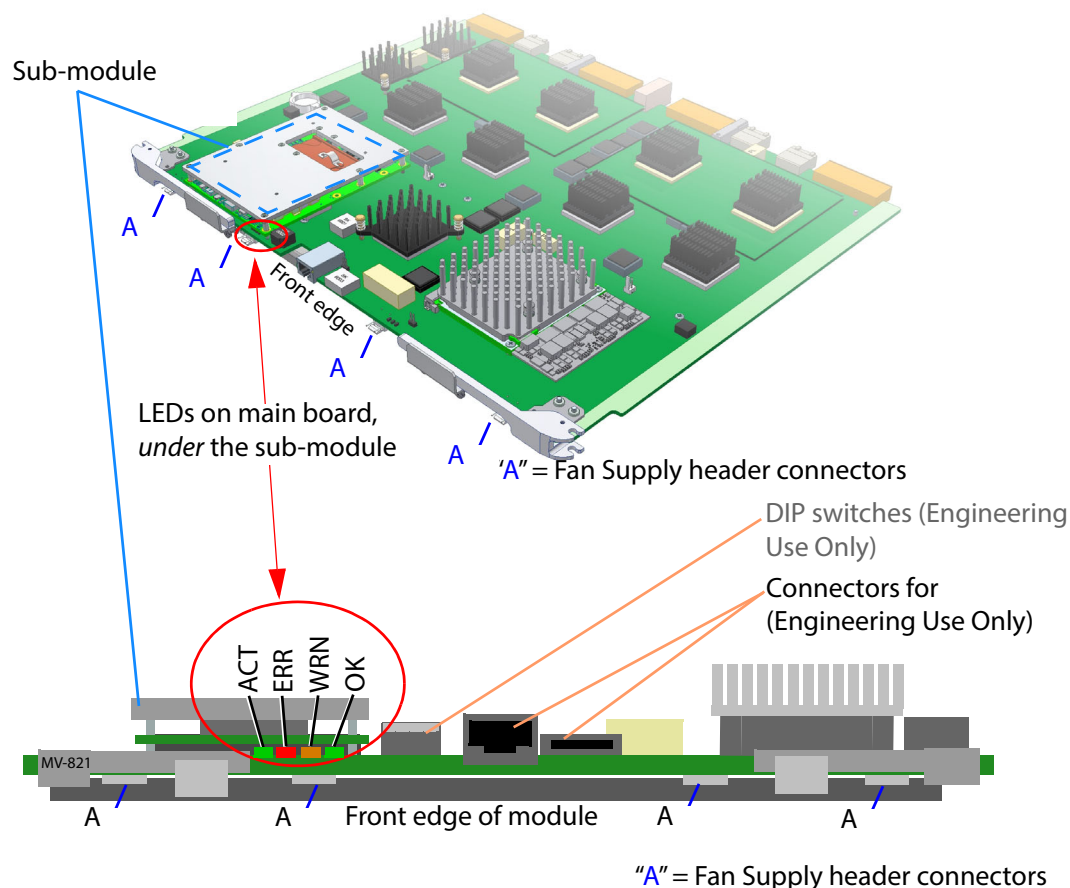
MV-821 Main Module - Status Indicating LEDs and Fan Supply Headers
